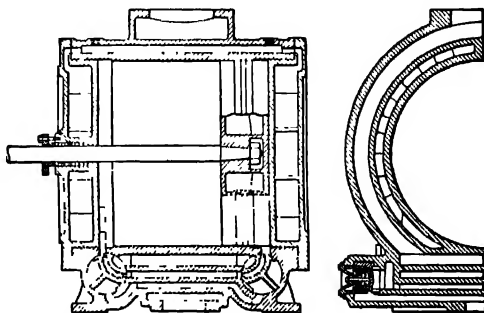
Air Cylinder Construction of Wheeler Dry-Vacuum Pump.
